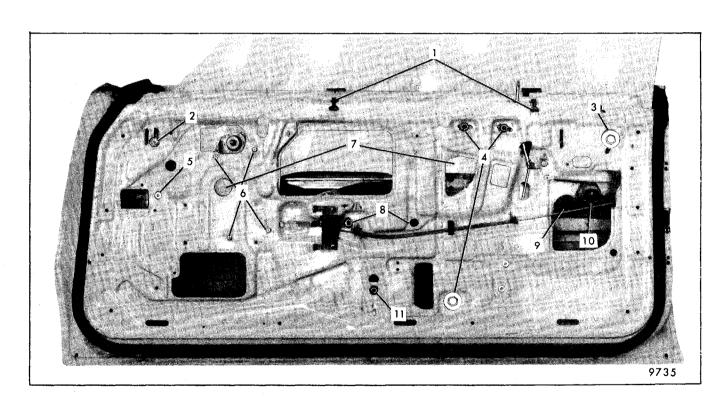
Front Door Window Hardware Attachments - A Coupe Styles
